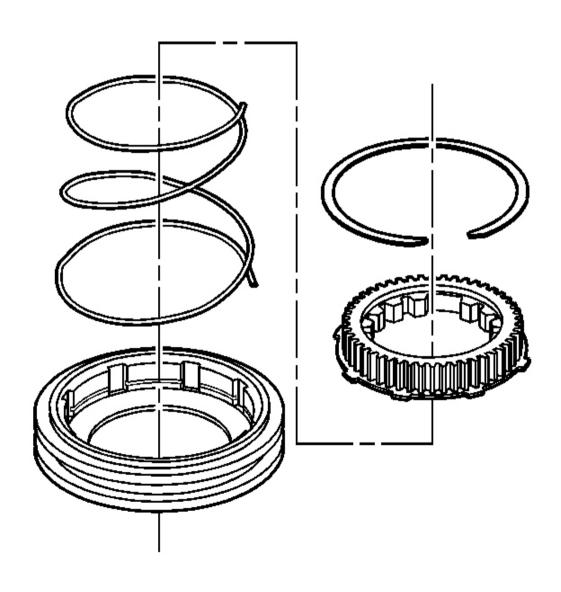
Lockup Shift Assembly Courtesy of GENERAL MOTORS CORP.
